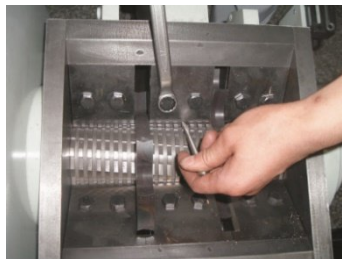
Installation of Bearing and Cutter Shaft 3
